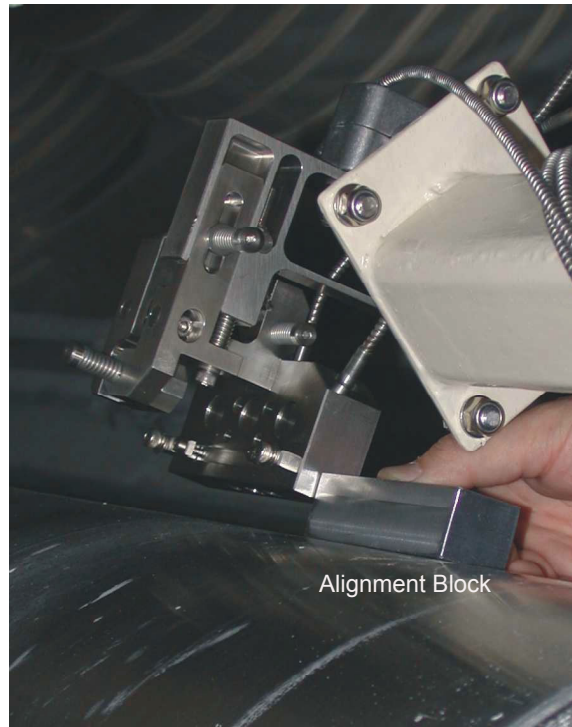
Sensor Alignment - Sensor Mounted Too Close to a Turning Roll
